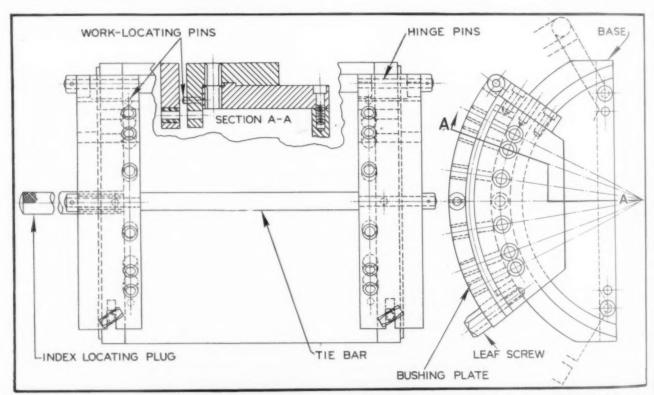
The drill jig. The base end members are machined from one casting, which is parted in a later operation to make two identical parts. A spacer plate joins the two members. The bushing plate—or leaf—is also machined in a lathe as are the two sliding members, the latter grooved sliding fit on the tongued base end pieces. Index holes, corresponding with the radial location of the drill bushings, provide for progressive indexing of the several holes.
